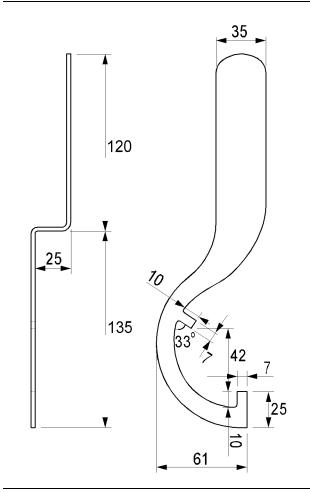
Breather tool  To remove the breather body, Tooling (A) must be used. The tool should be fabricated from 3.1 mm (1/8 inch) steel stock. The dimensions for the tool are given in Illustration 209. All dimensions are shown in millimeters.
